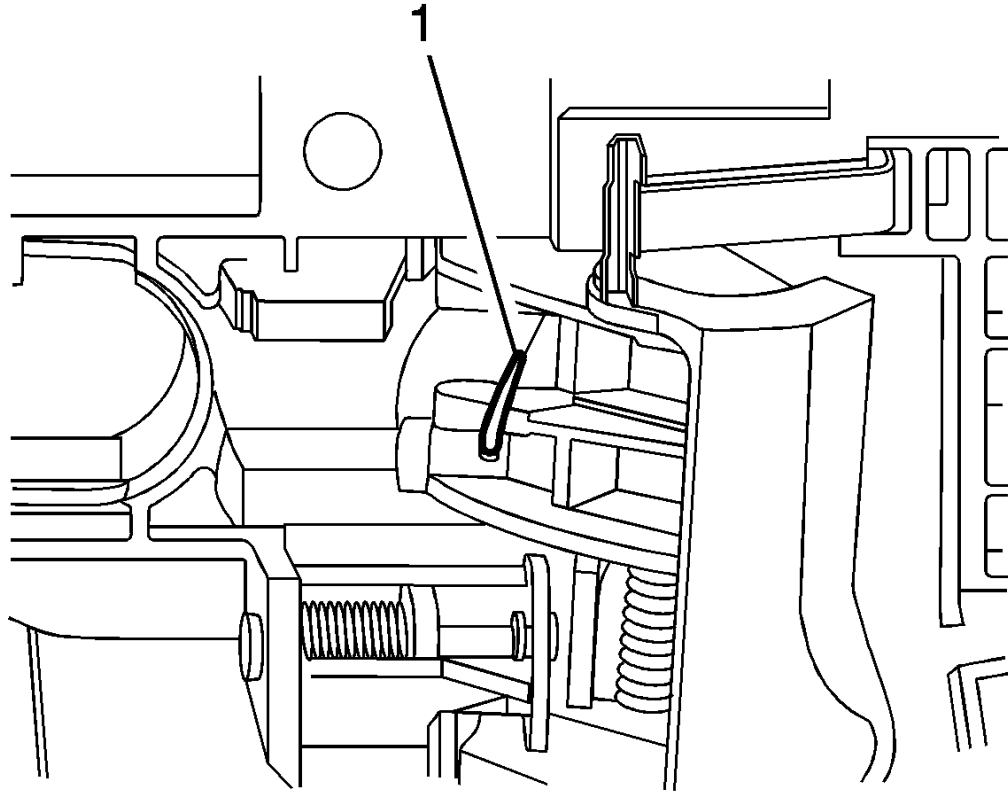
Hooked Pick Tool And Door Handle Mechanism
